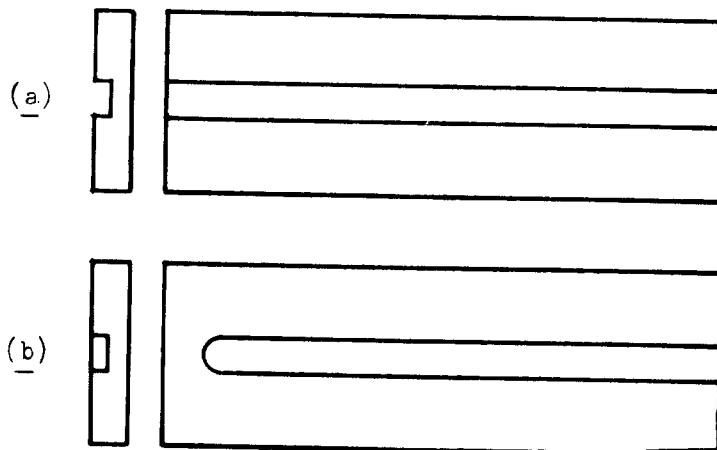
Figure II. Machining grooves in a through-feed operation: (a) possible with standard machines; (b) not possible with standard machines
